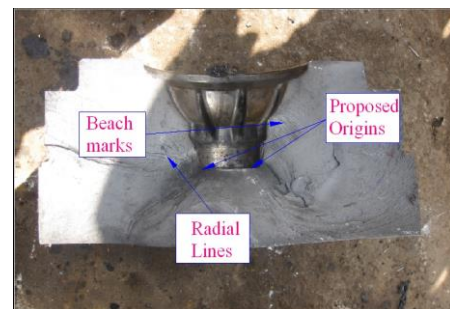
Photograph of die fracture surface with origins, beach marks and radial lines marked
